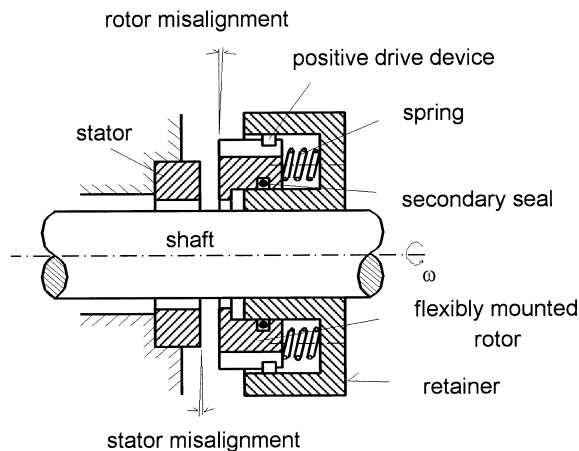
Scheme of the non-contacting FMR mechanical face seal
